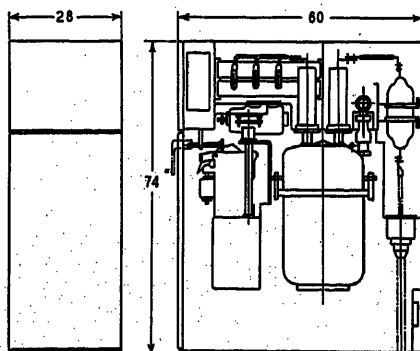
Modern metal-clad switchgear unit equipped with 150,000-kva oil circuit breaker
